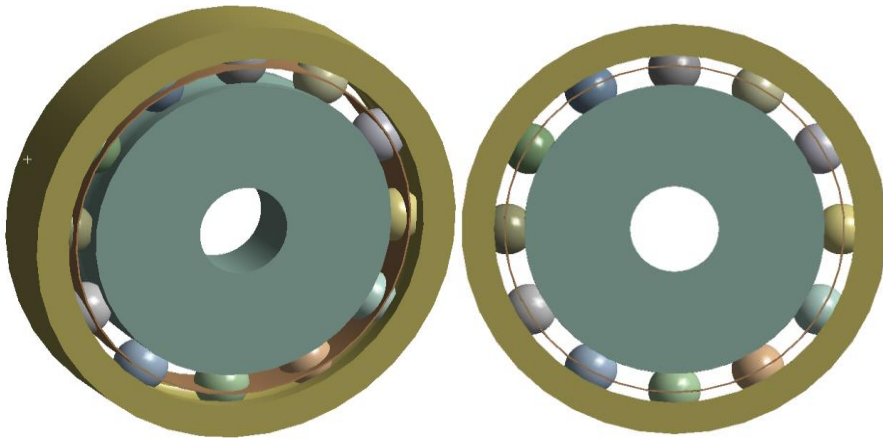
CAD model representation in three dimensions of a deep groove ball bearing
